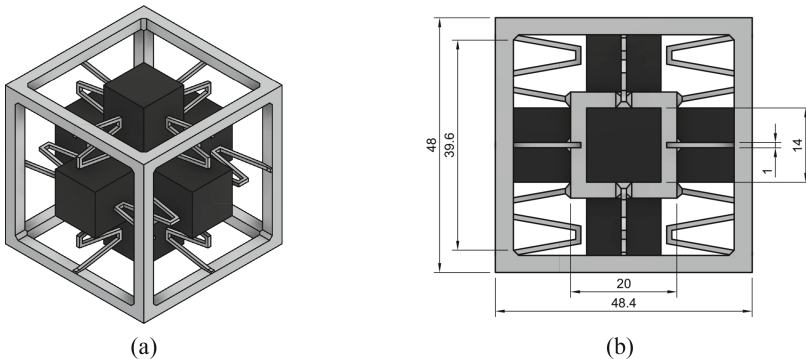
The proposed transducer (a) shape and (b) dimensions.
